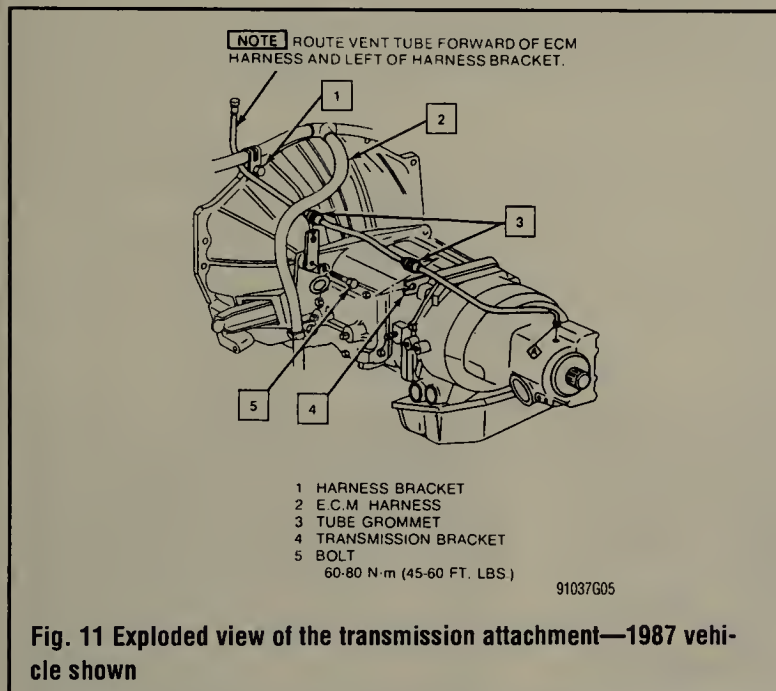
Exploded view of the transmission attachment—1987 vehicle shown
